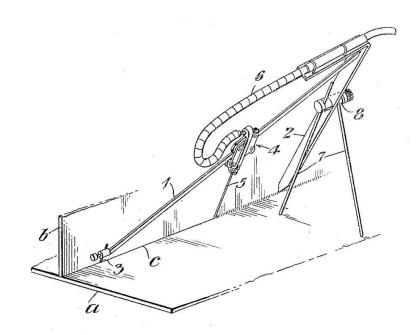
design appearance of the unit for gravity welding of t-joints
